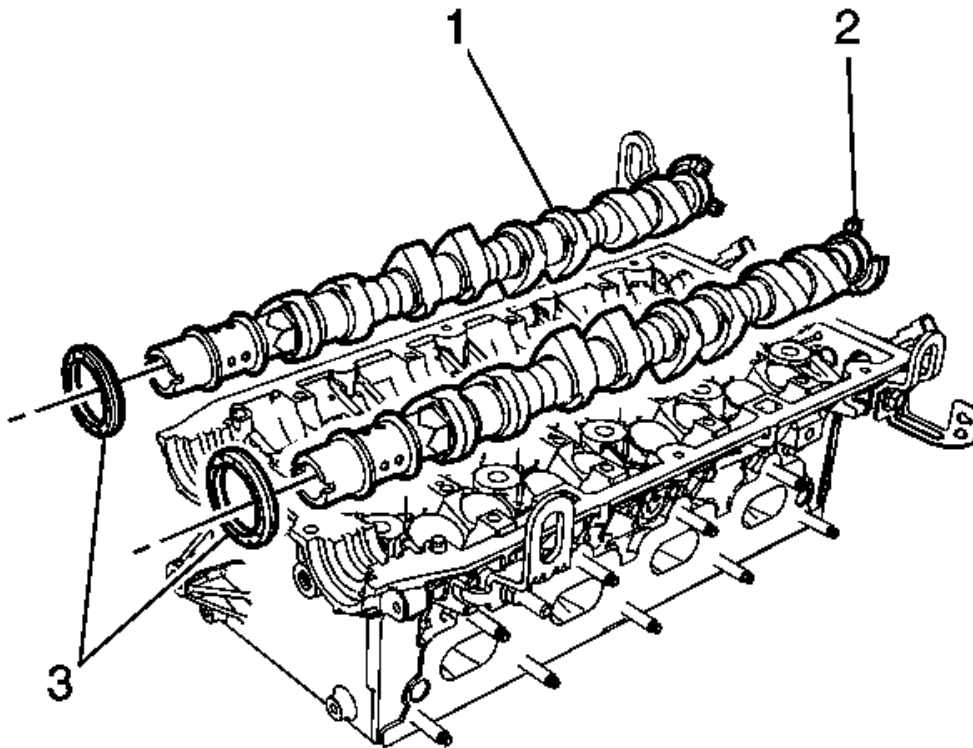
Intake/Exhaust Camshafts With The Seal Rings
